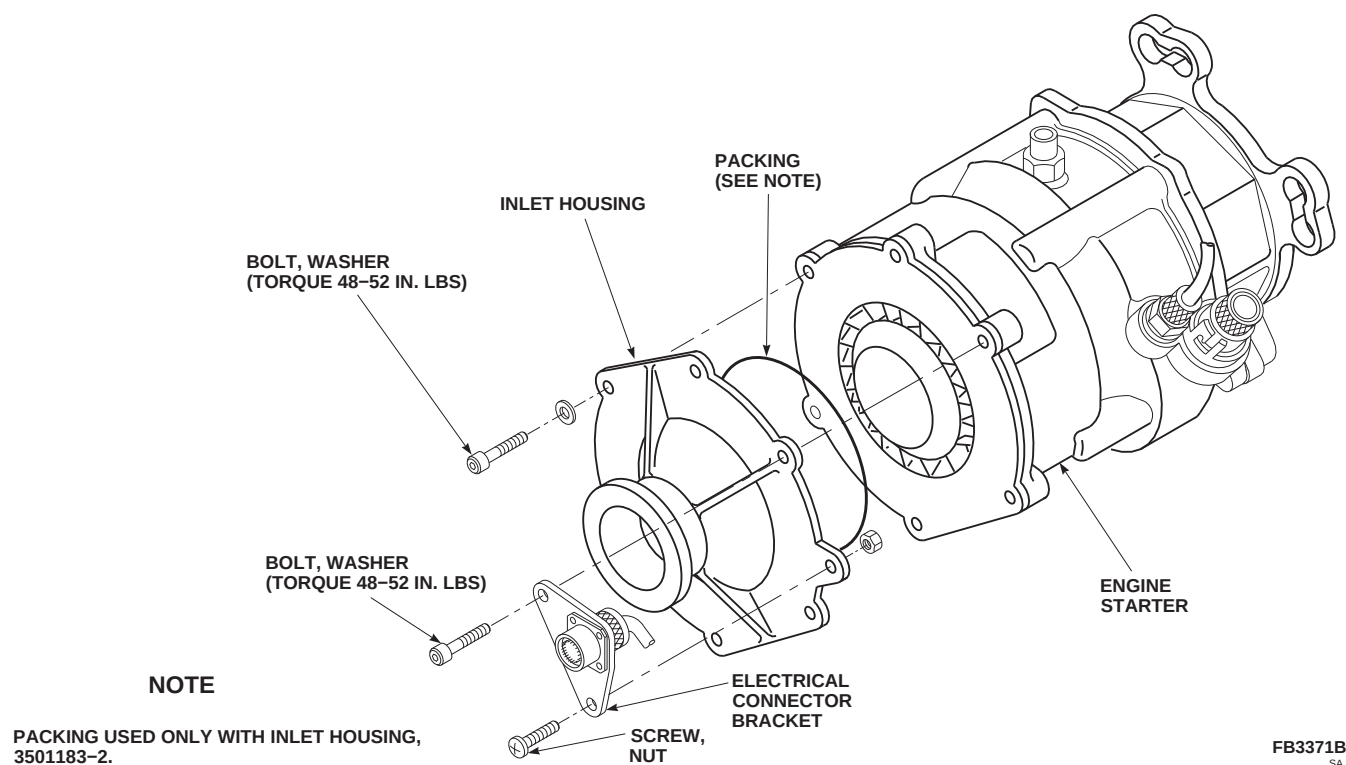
REPLACE INLET HOUSING
